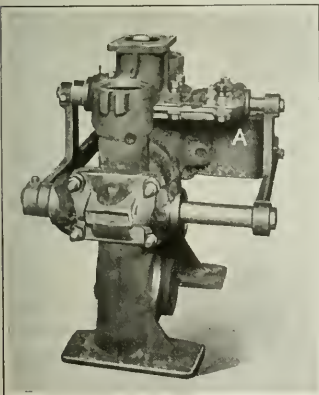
Babbitting Fixture for Gear and Pinion Shaft Bearings
